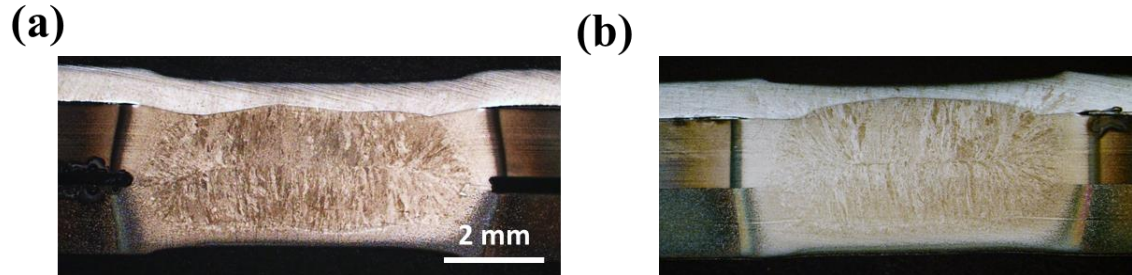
Macrostructure of resistance spot welding of 3T stack-up with (a) 6 mm Class 1 electrodes, and (b) 6 mm Class 3 electrode and 8 mm Class 1 electrode on thin and thick sheet side respectively. Other welding parameters are welding current = 9.5 kA, and electrode force = 4.4 kN
